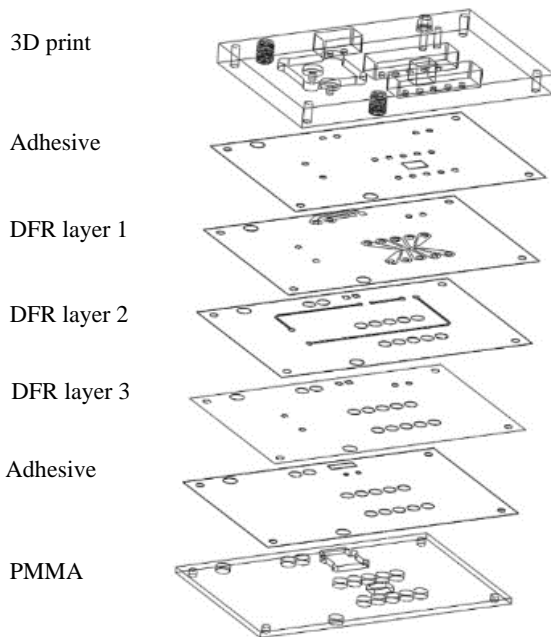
Exploded view of the flow sensor design. The fluidic layer consists of 3 layers of dry foil resist, which is bonded in between a 3D printed and a bottom PMMA layer using laser-cut pressure sensitive adhesive.
